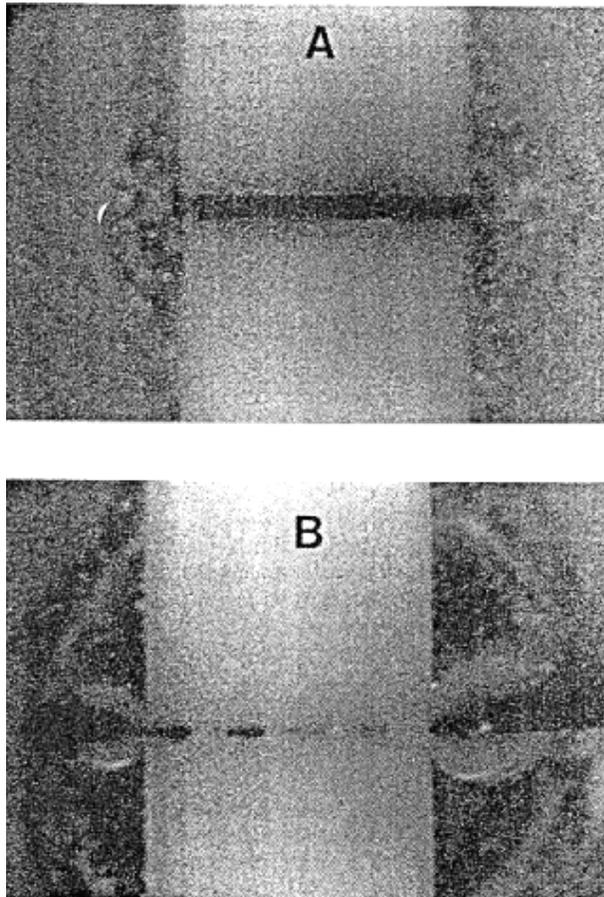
Photographs of microwave welded joints. In A, the gasket remained intact after welding; in B, gasket material was squeezed out of the joint during the welding process producing a stronger weld.
